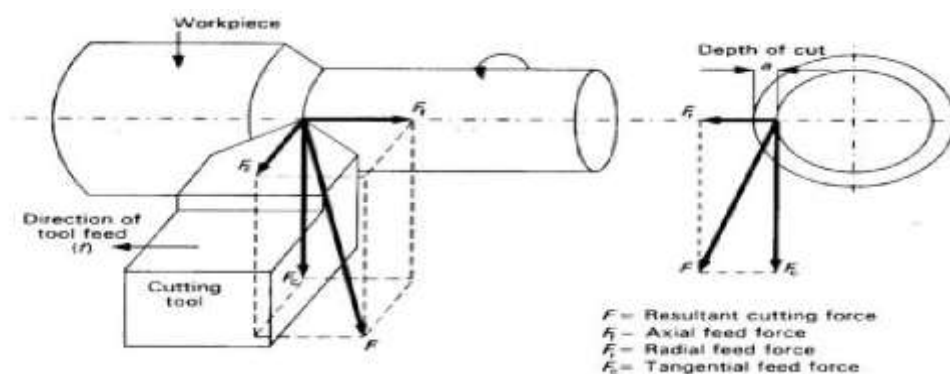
Cutting Forces Acting on Cutting Tool [1]
